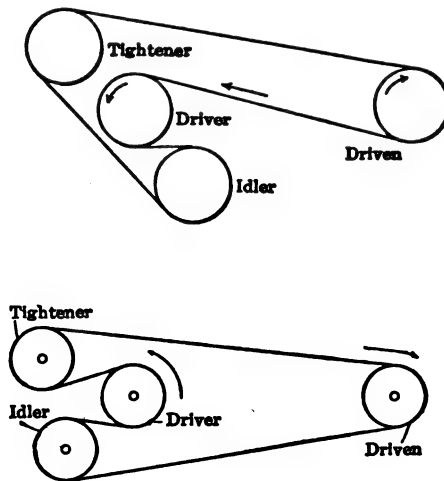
ARRANGEMENT OF PULLEYS FOR REVERSE DRIVE.
